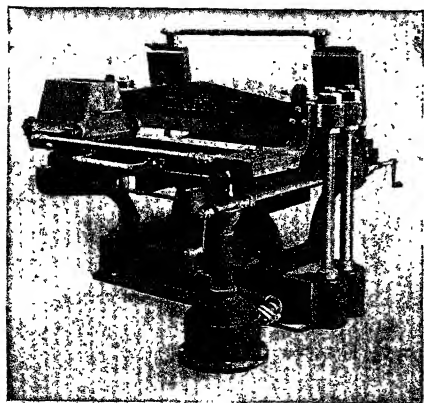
BUCKEYE DOUBLE HYDRAULIC CAKE FORMER.
